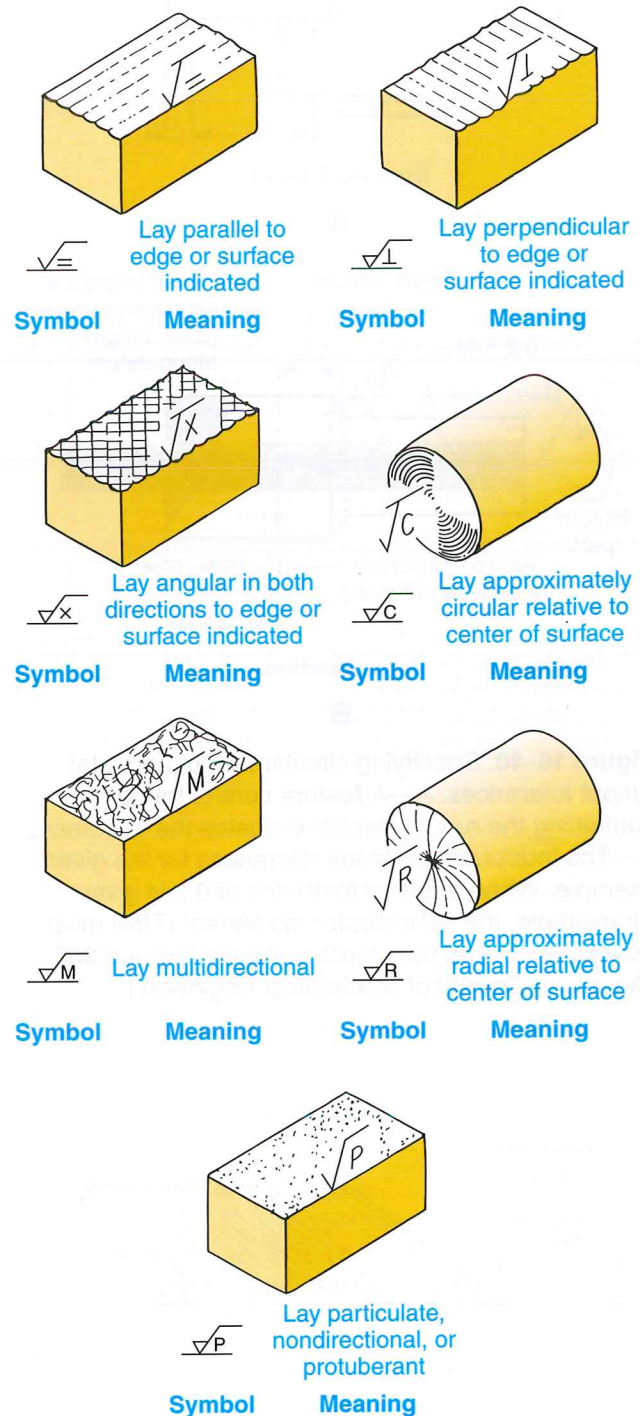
Lay symbols and their meaning. (American Society of Mechanical Engineers)
